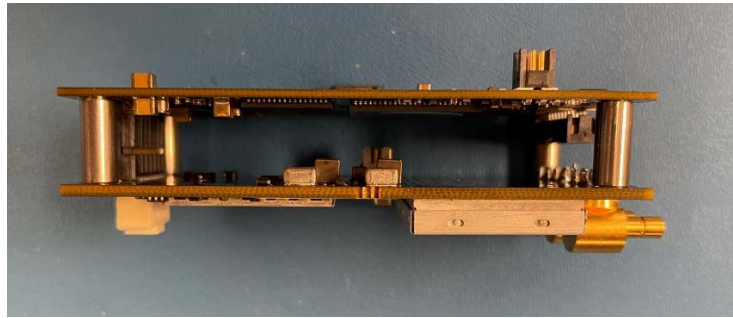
OCU220 Module. Bottom PCB is radio (Figure 2) and Top PCB is processor (Figure 3)
